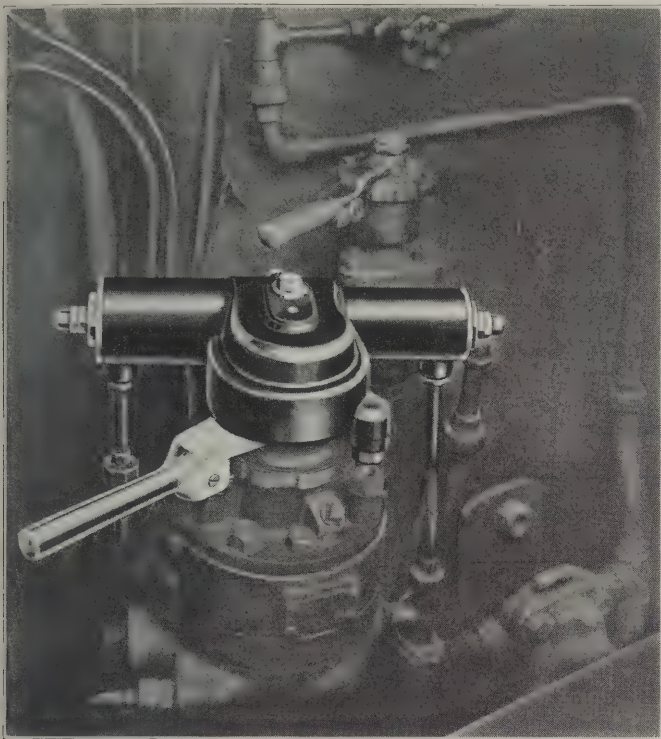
The Brake Handle Actuator in Place on the Engineman's Brake Valve
